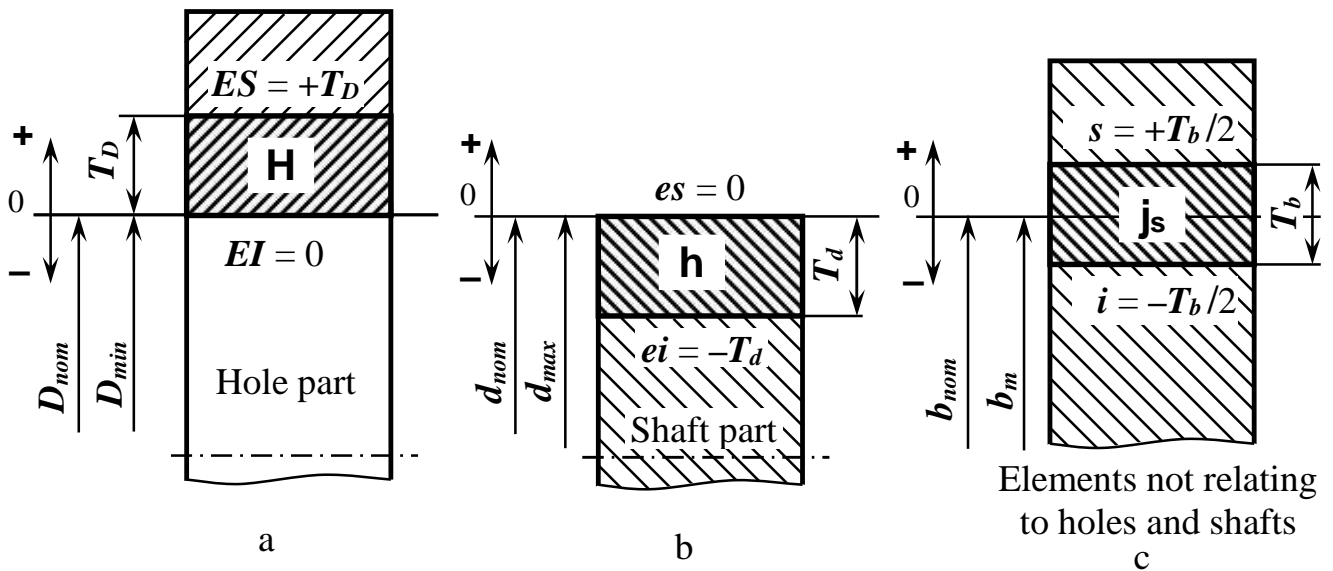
Diagram of positions of tolerance bands for specifying the executive (manufacturing) dimensions: a – for hole type parts (basic hole dimension); b – for shaft type parts (basic shaft dimension); c – for elements of parts not relating to holes and shafts (dimension with symmetric deviations)
